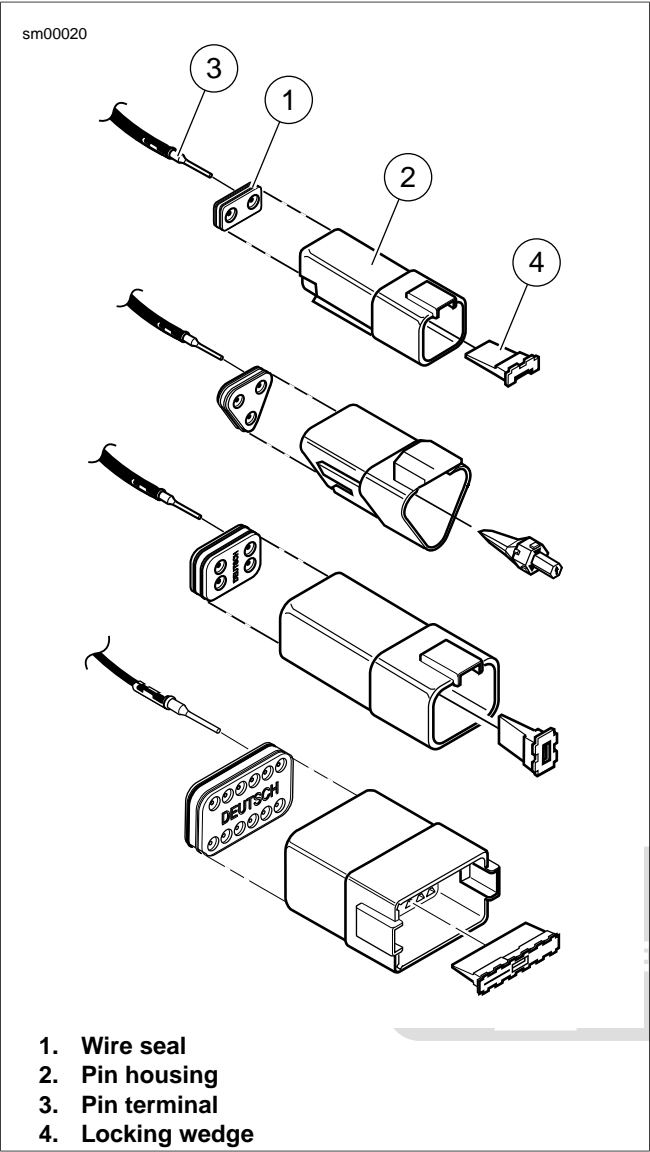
Deutsch Connector: 2, 3, 4 and 12-Place Pin Housings
